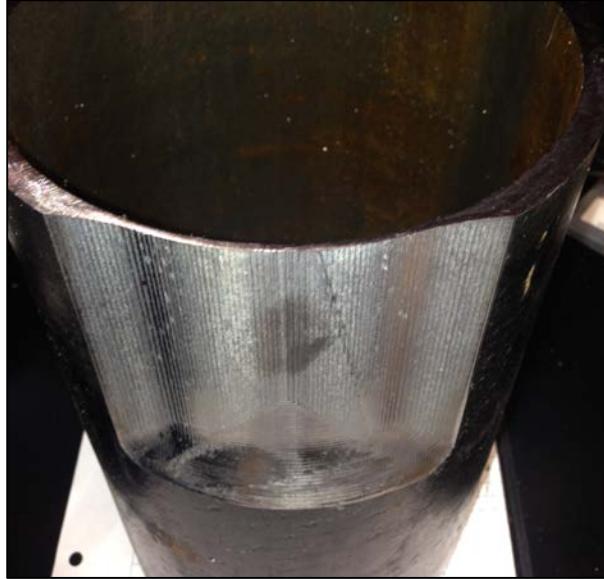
Cross section of defect immediately following CNC machining
